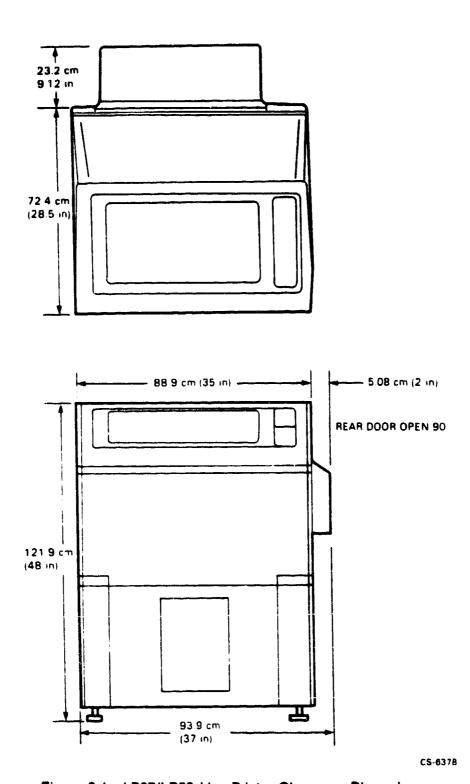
LP27/LP29 Line Printer Clearance Dimensions
